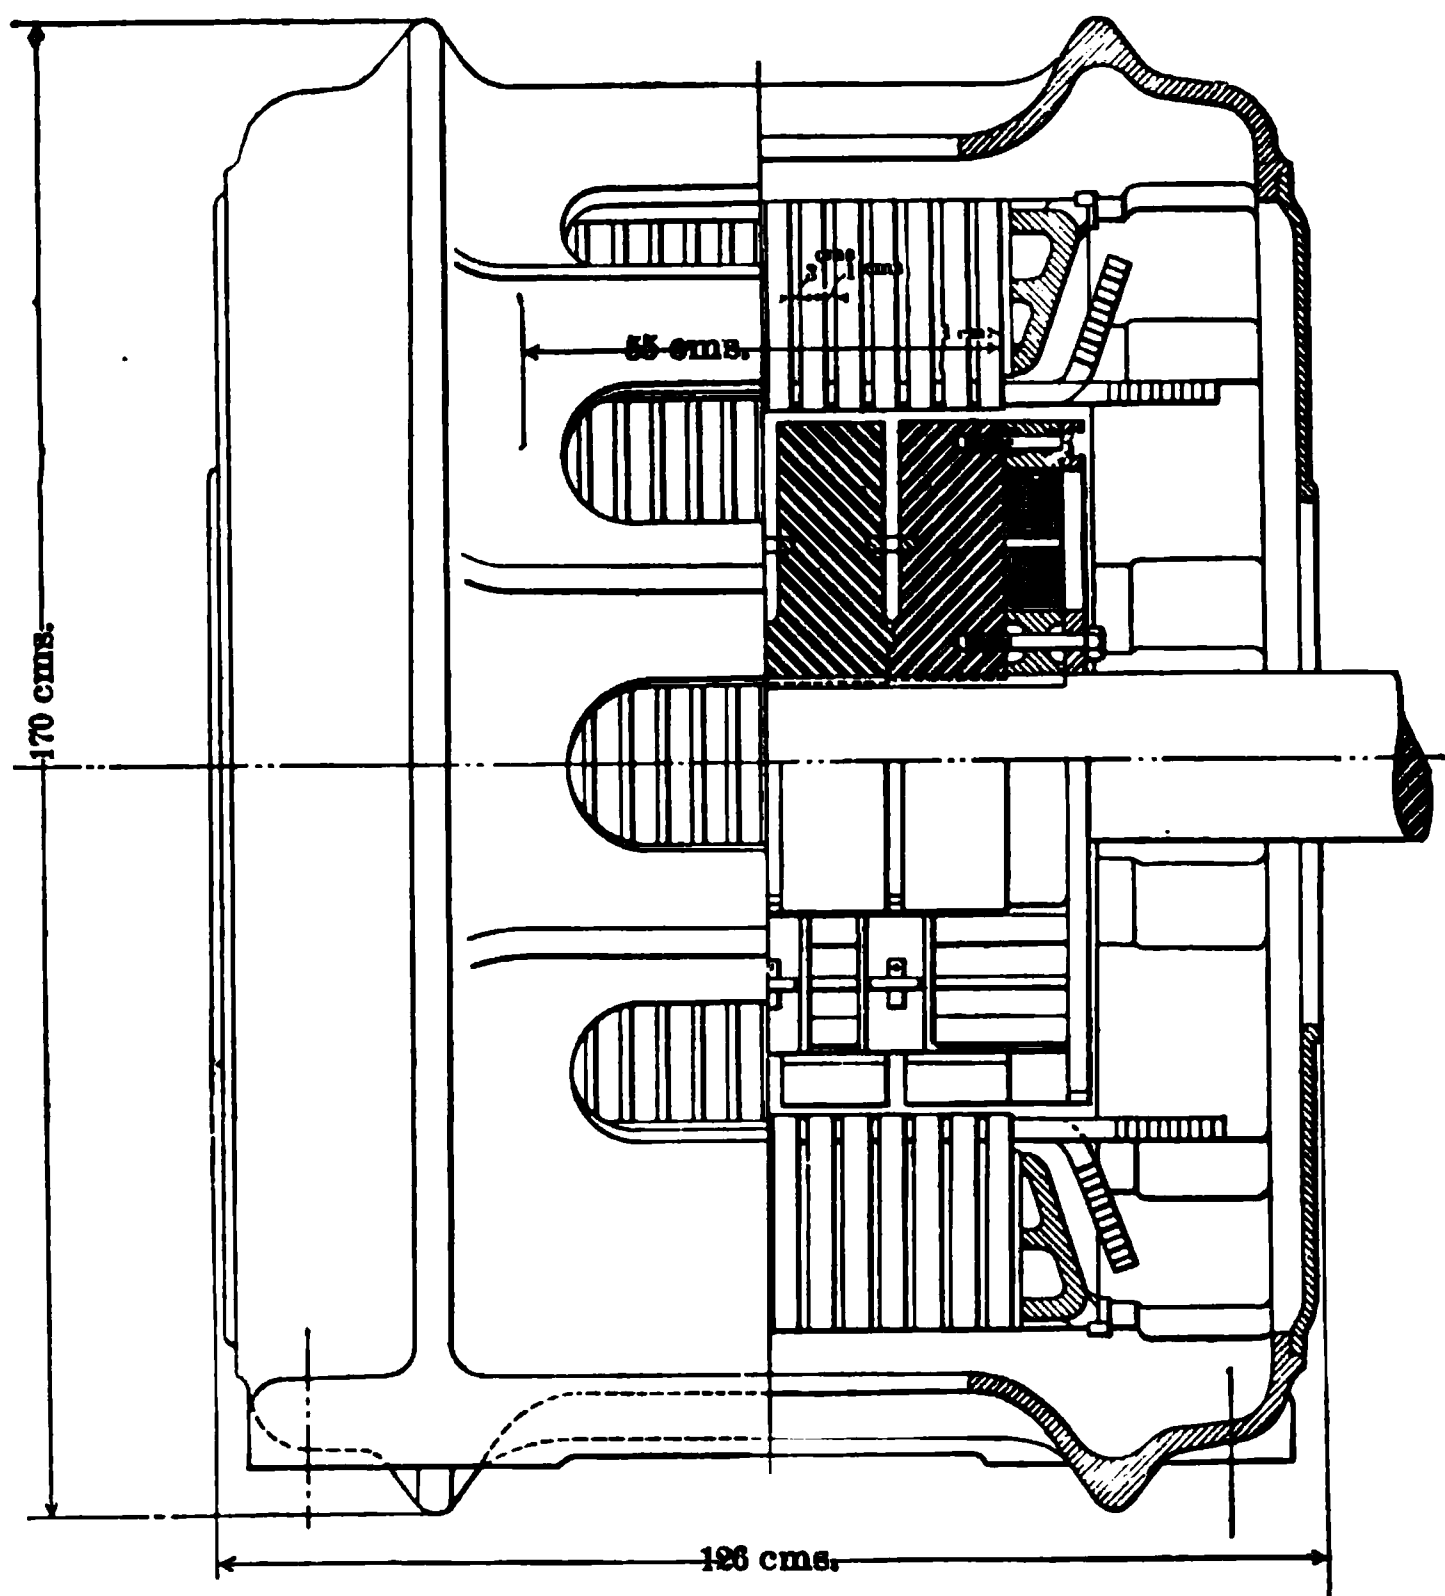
Outline drawing of assembly of 650 kva. 1500 r.p.m. 50-cycle 4-pole 3-phase alternating current generator.
